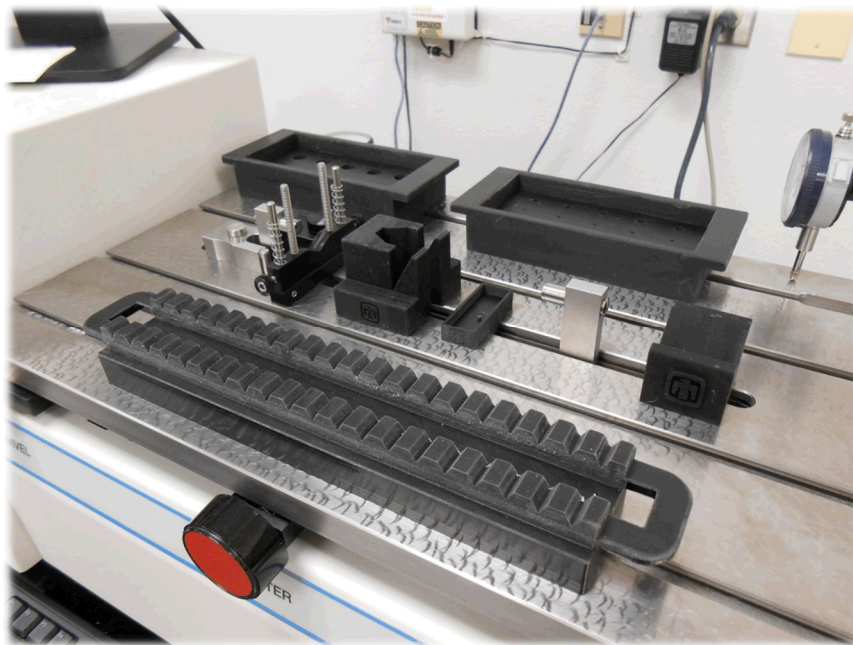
Simple Groove Fixture for Measuring Gage Balls Larger than 5 mm in Diameter.
